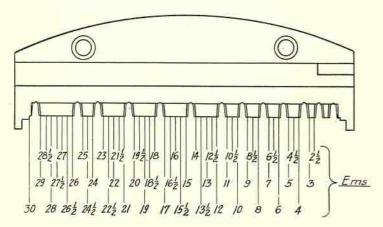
Standard Rib Arrangement for 30-em recessed six-pocket mold, showing length of slug which can be cast.
